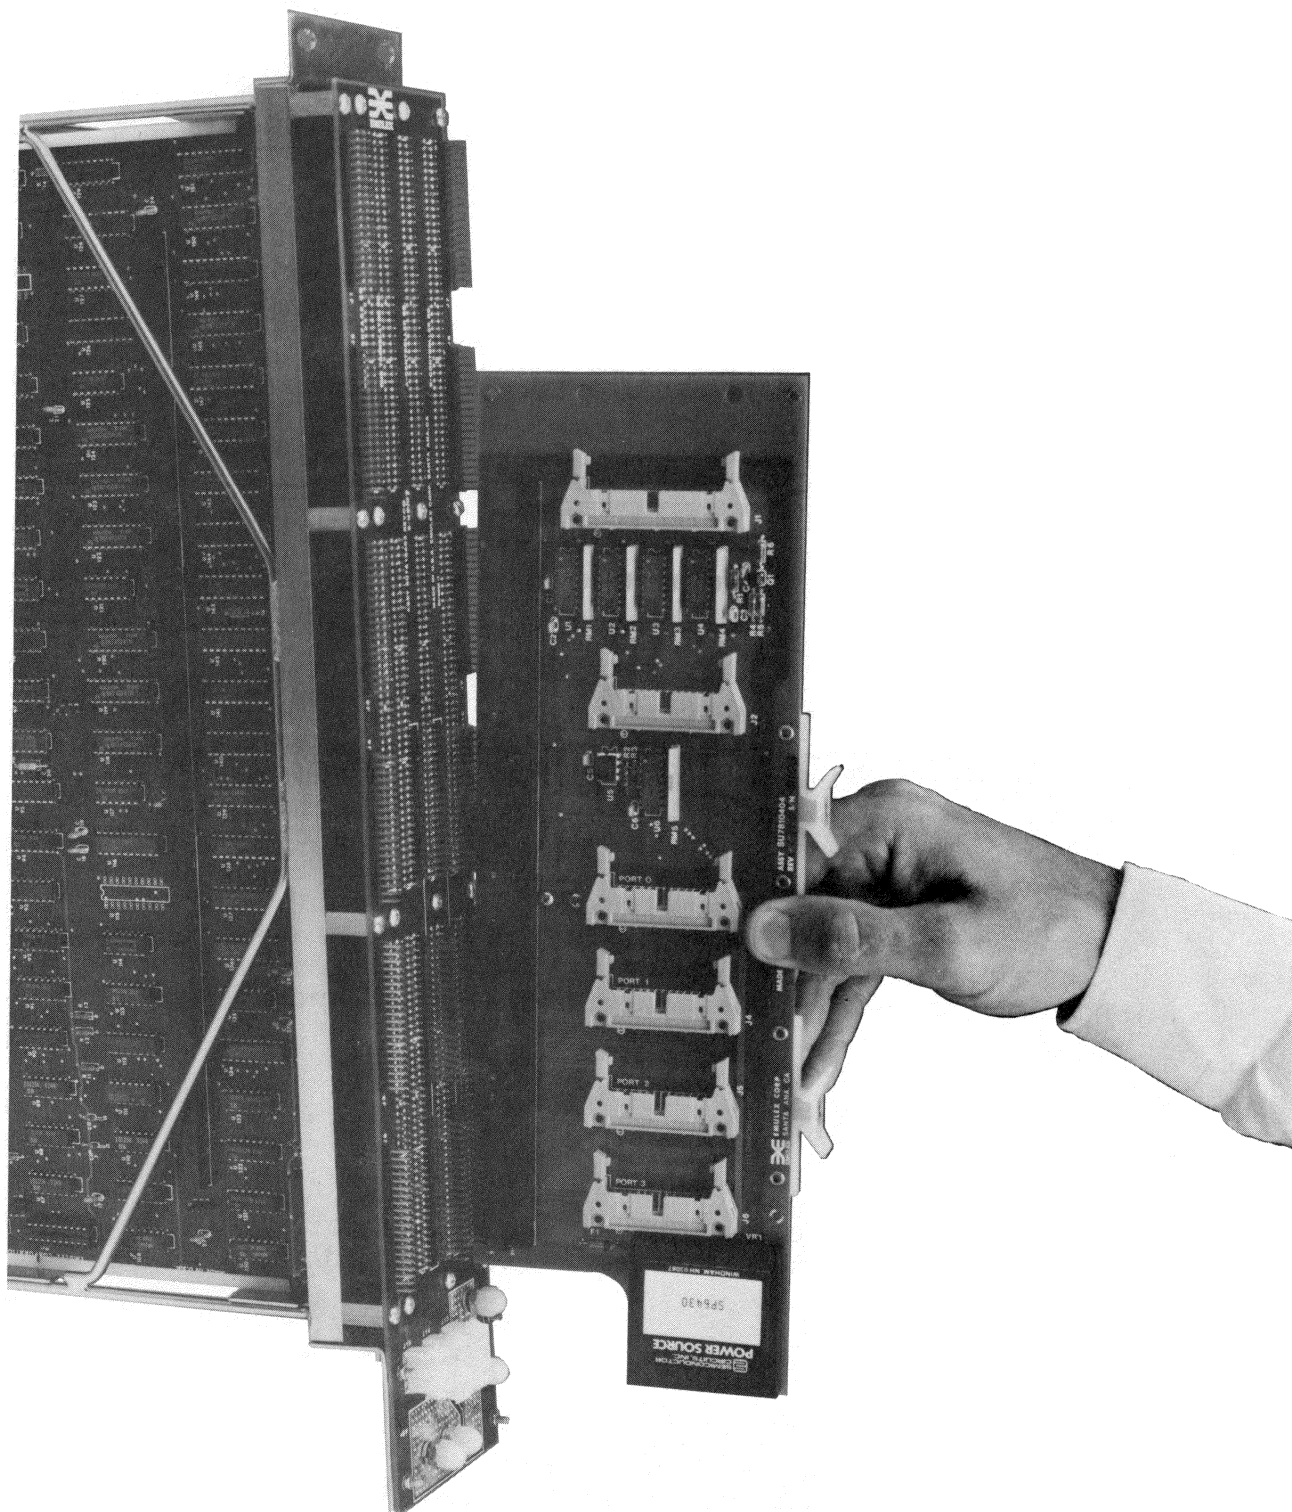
Cable Paddleboard PCBA Installation in V-MASTER/780 Card Cage
